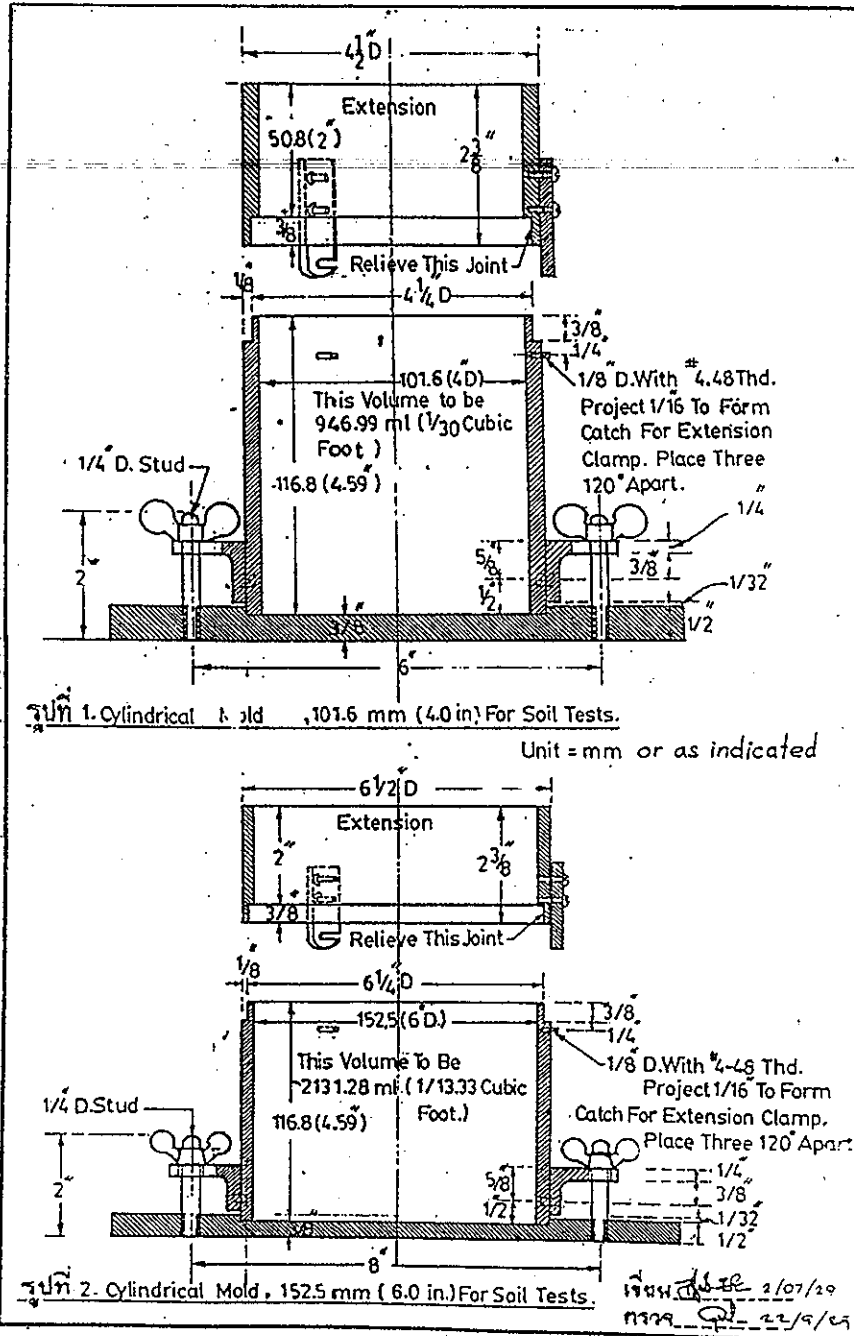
Cylindrical Mold, 101.6 mm (4.0 in.) For Soil Tests.
